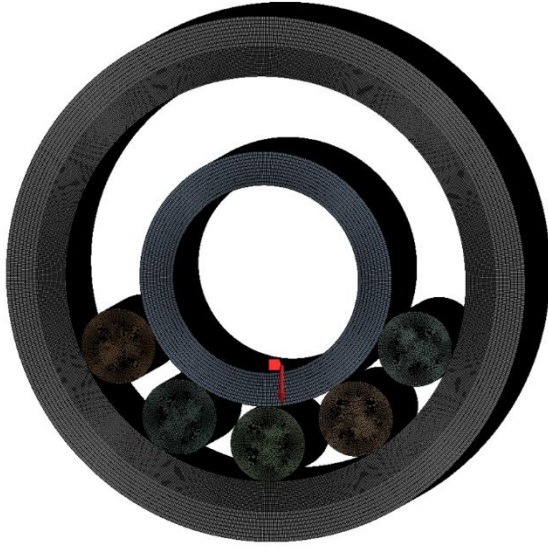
Finite element model of the cylindrical roller bearing with housing.
